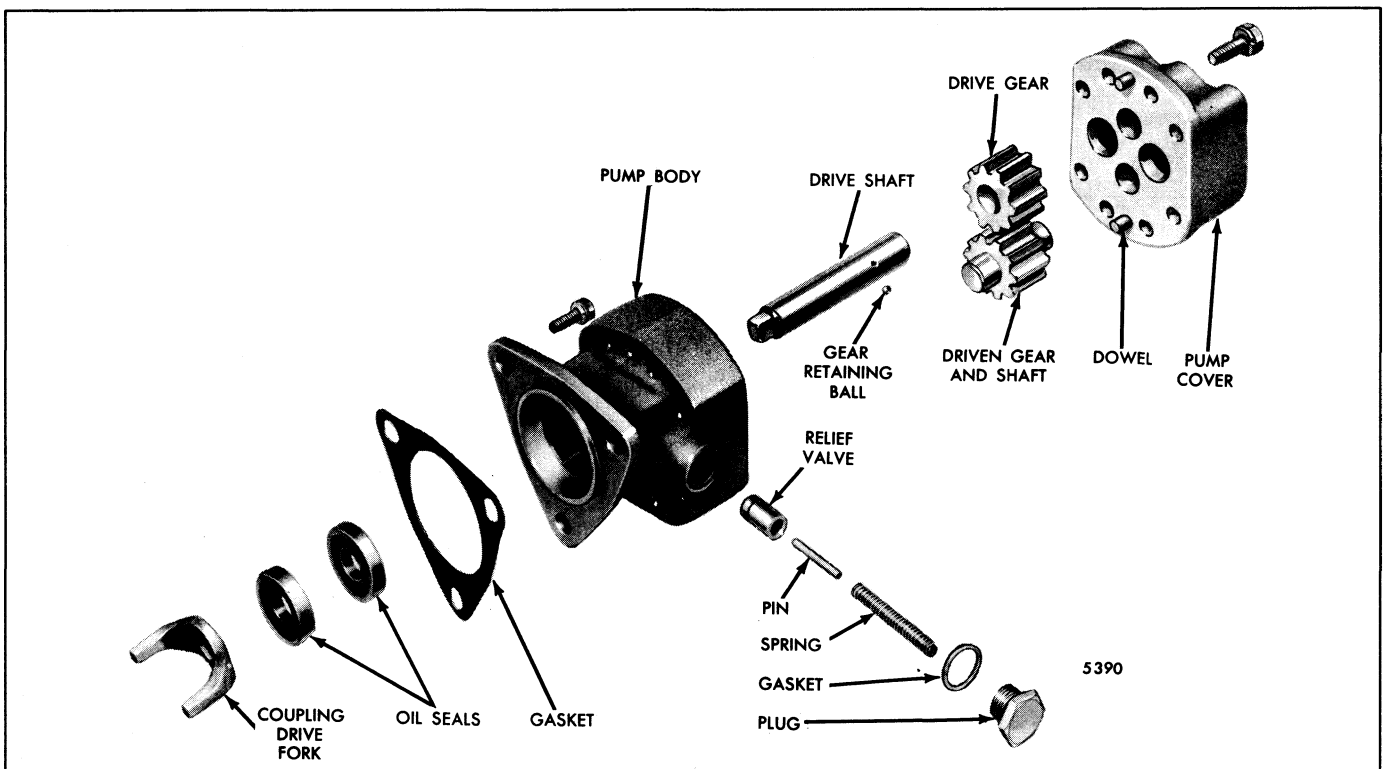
Former Fuel Pump Details and Relative Location of Parts
